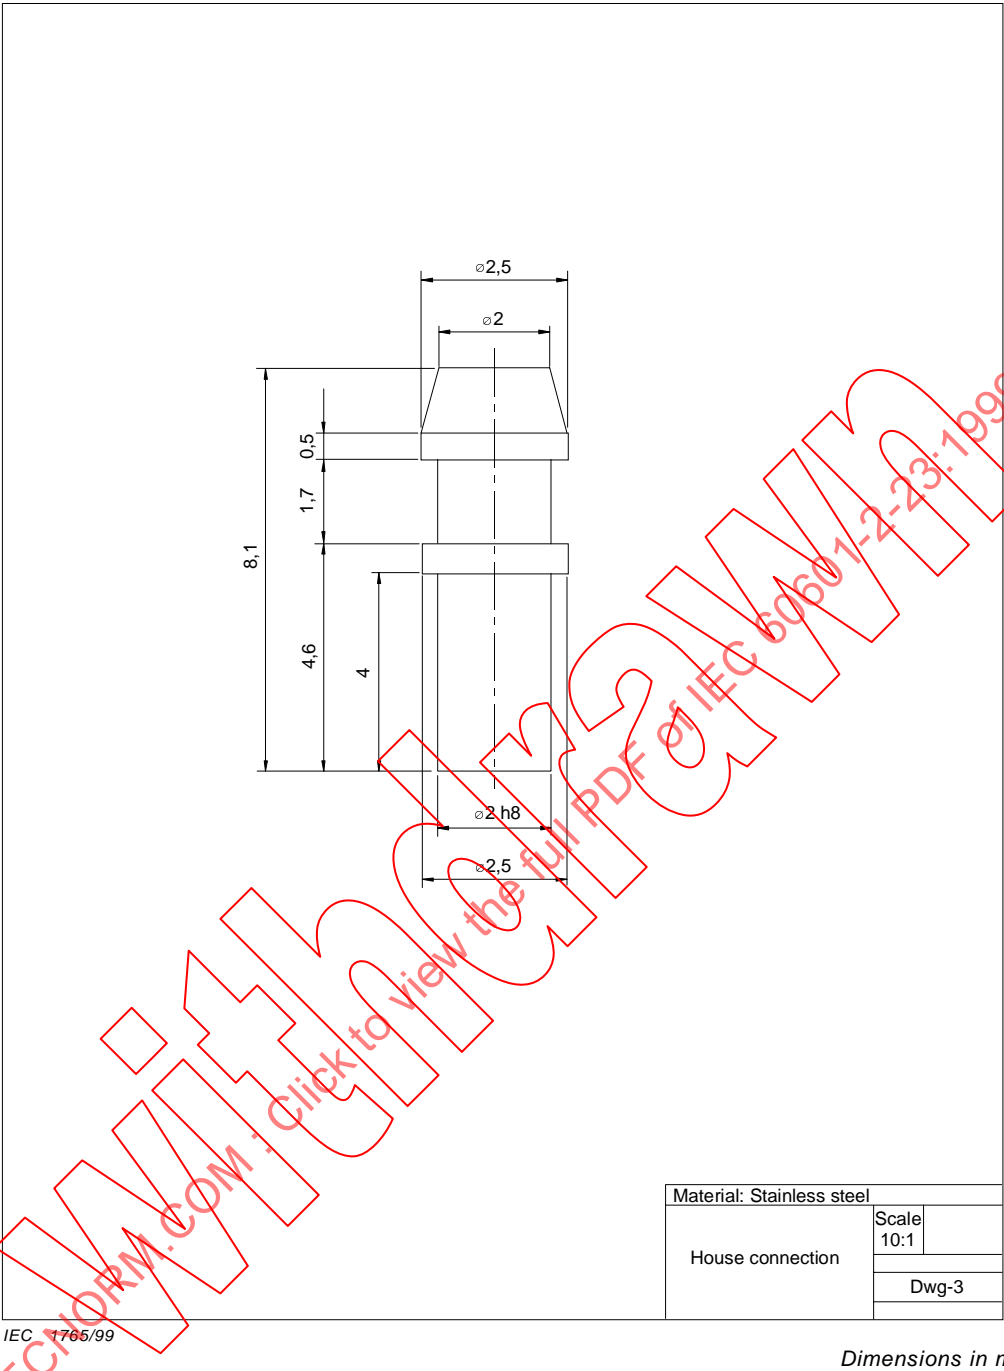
Linearity and hysteresis test set-up – Gas mix chamber, dimensions of hose connector
